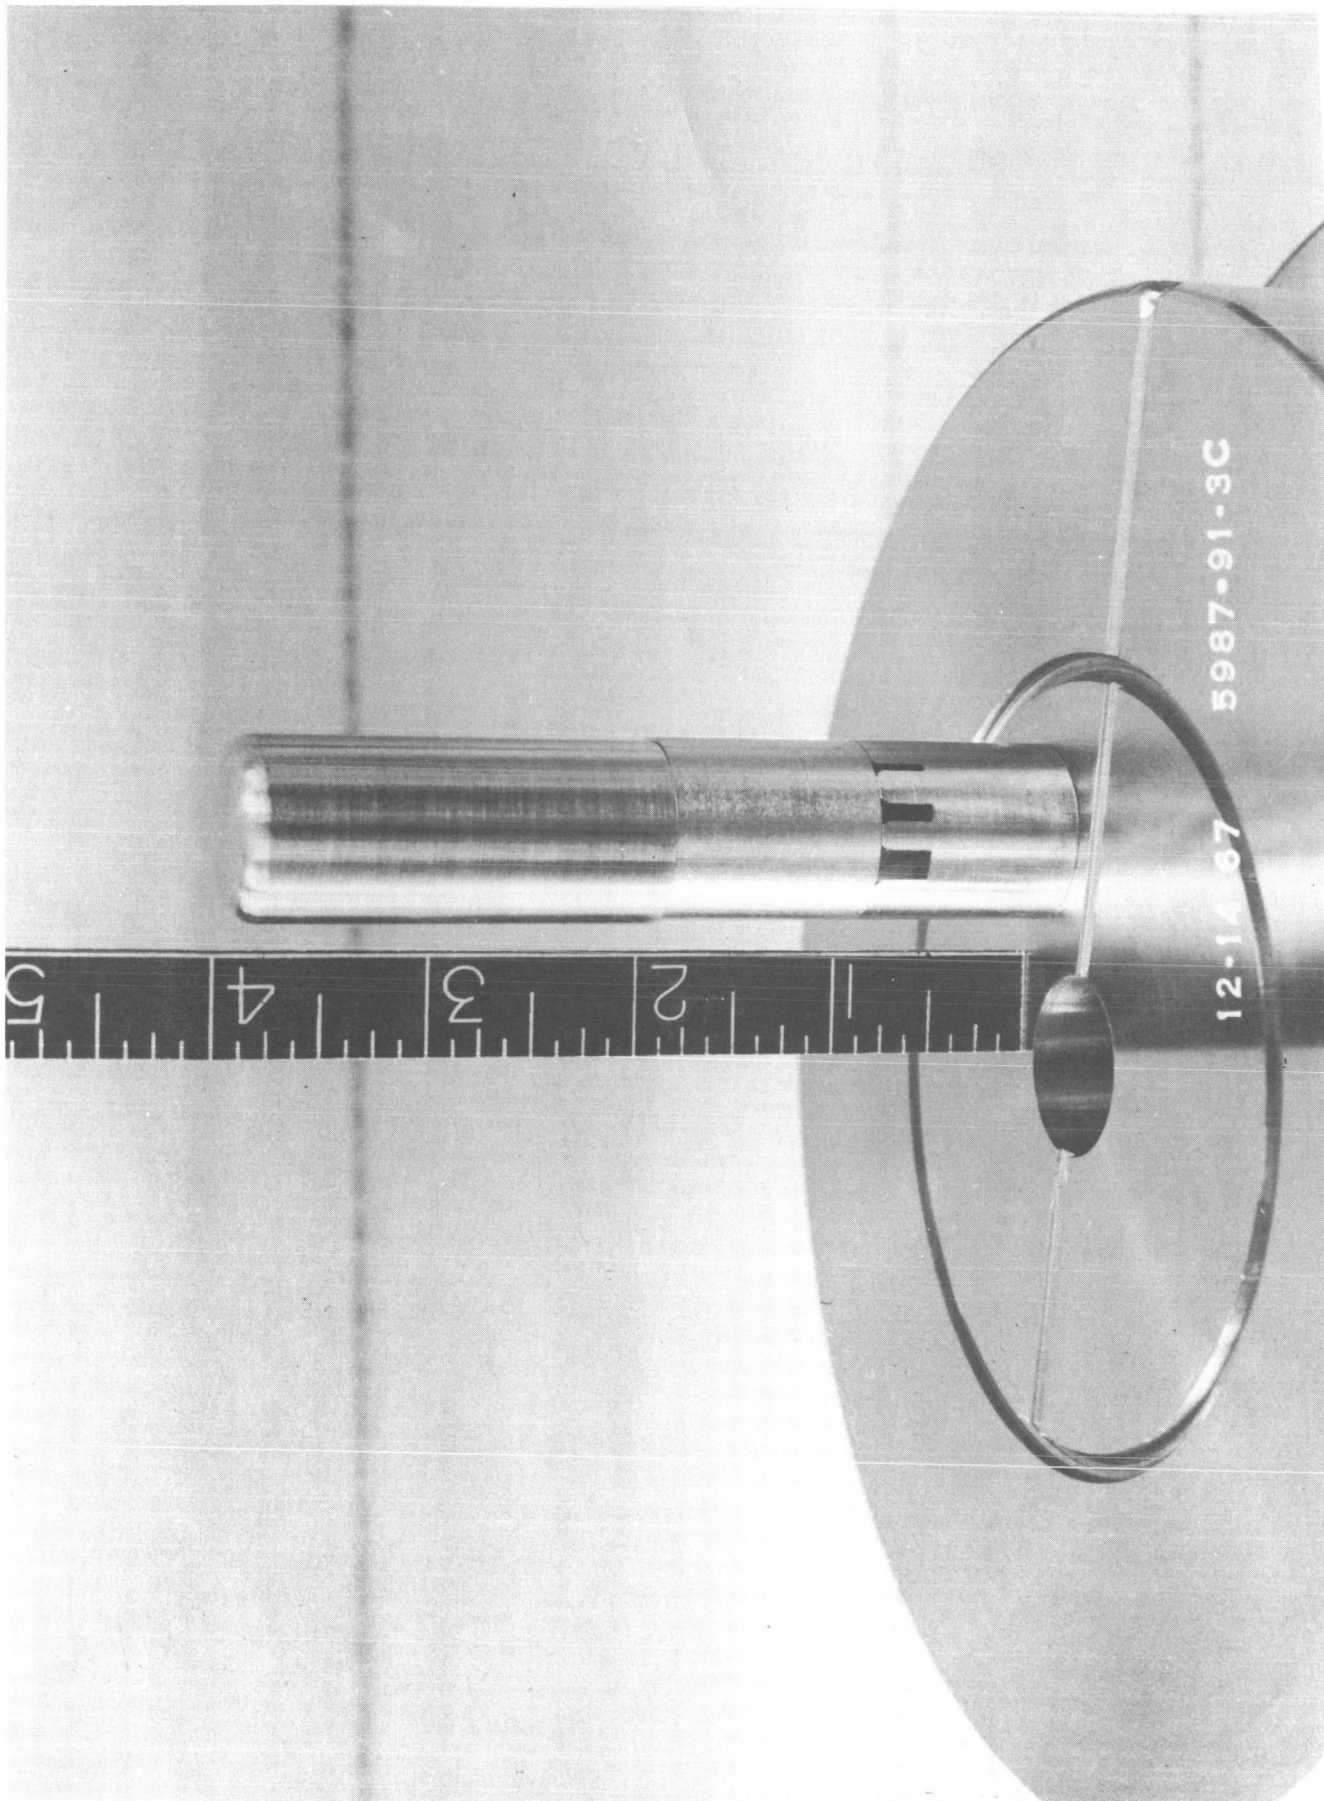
Close-Up View of Restrainer, Die, Plunger and 7/8 Inch Specimen.
